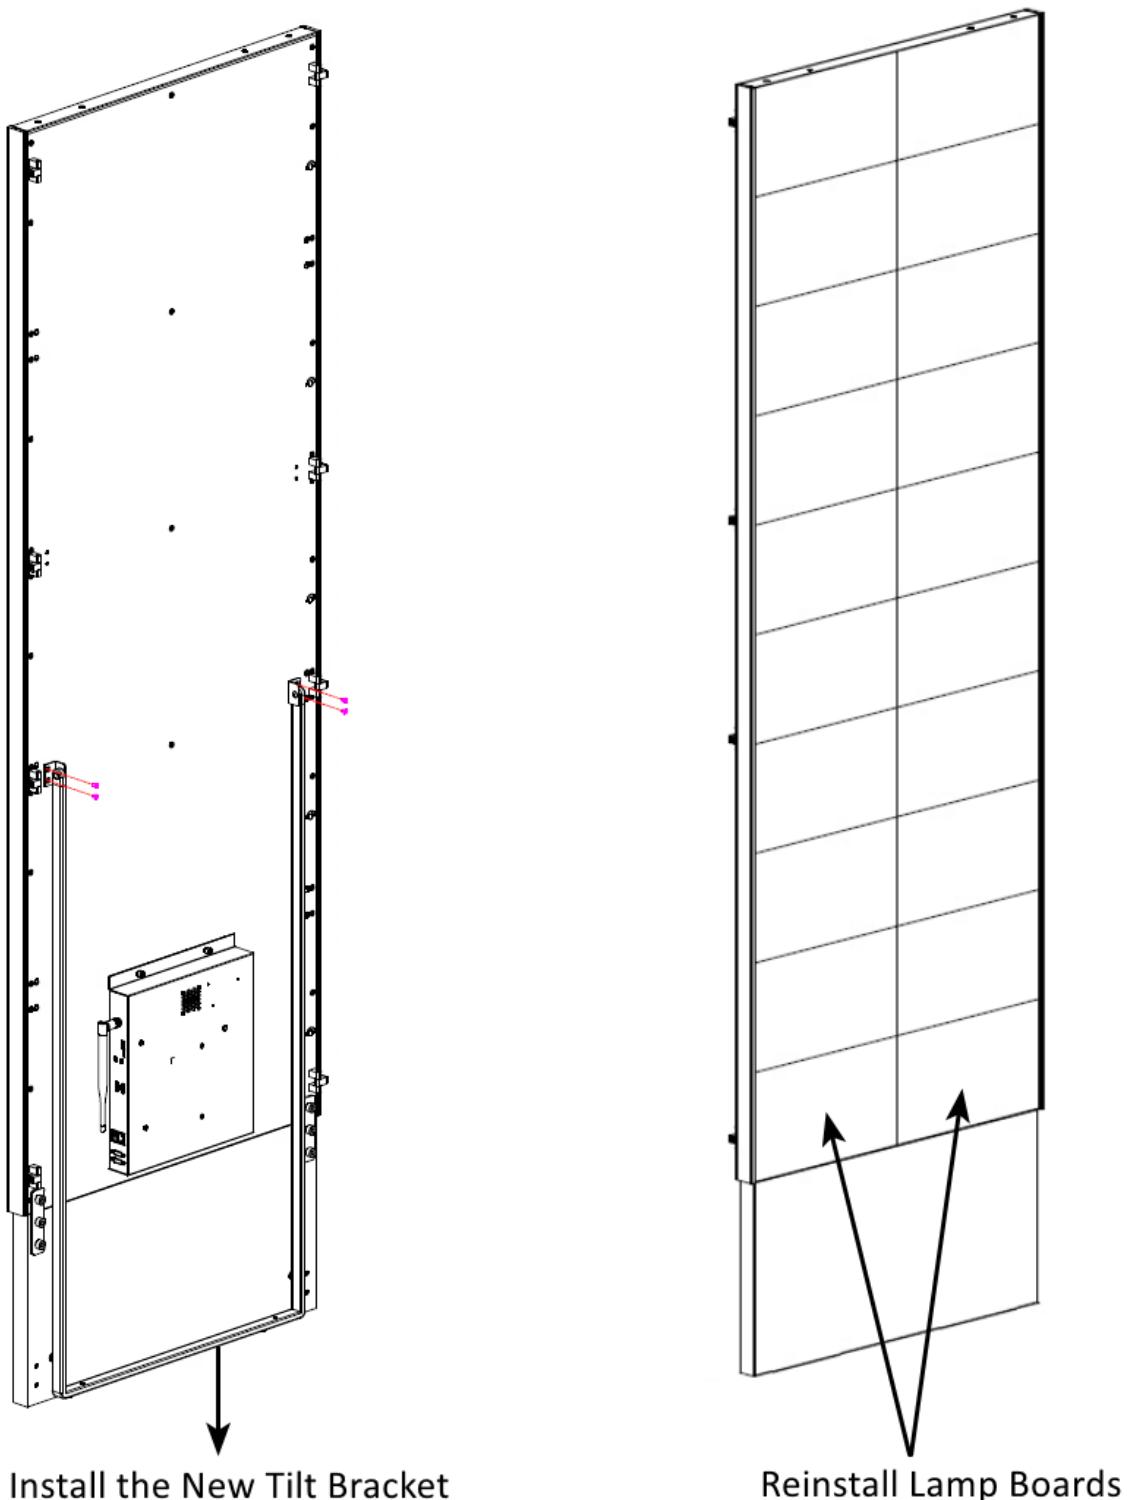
Install A New Tilt Bracket and Reinstall Lamp Boards
